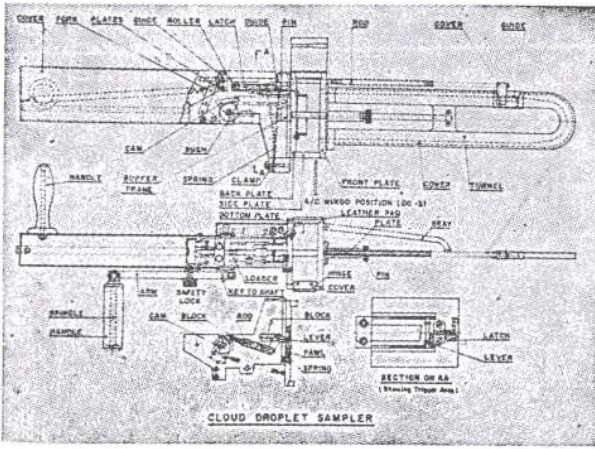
Detailed mechanical drawing of the multi-slide cloud-droplet sampler
